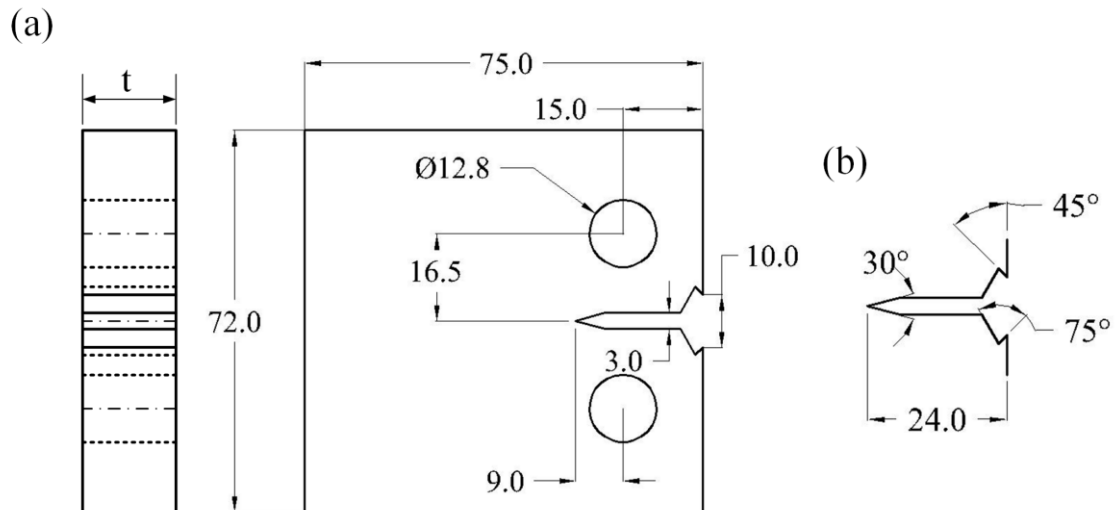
(a) Dimensions of the CT specimen. (b) Dimensions of the starter notch.
